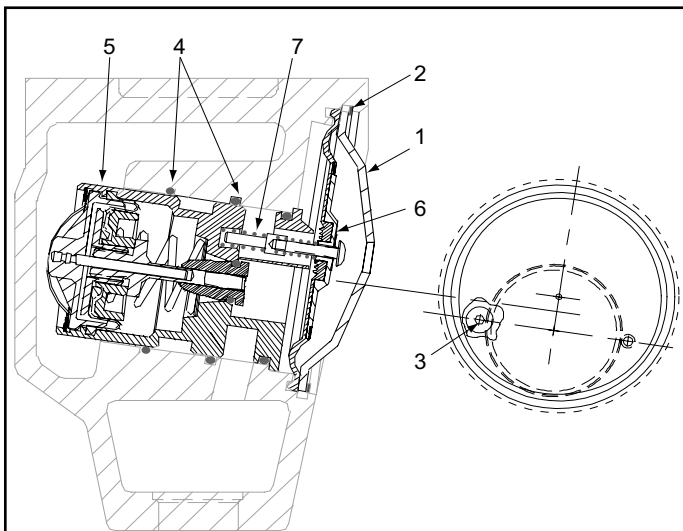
600 Nozzle Vapor Valve Cross-Section View
